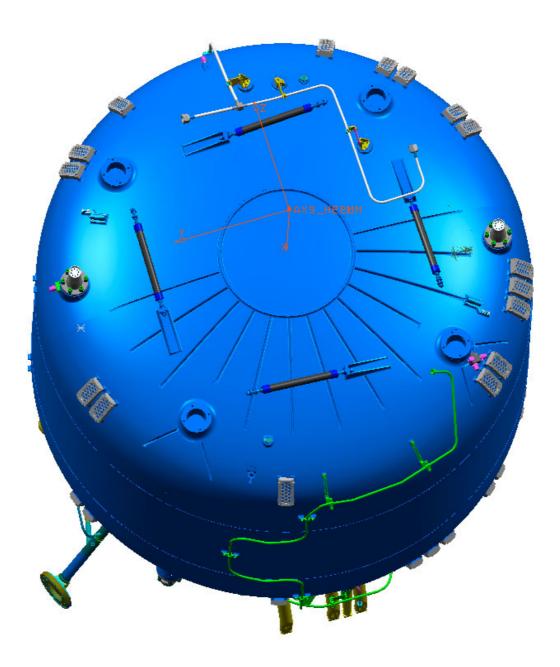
Bottom view of fully integrated HTT shown with He sub-system equipment and accelerometers (w/o SFW and MLI
